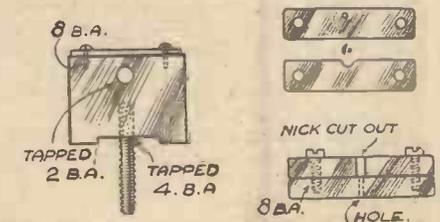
(Left) The top clamp. (Right) The bottom clamp.
